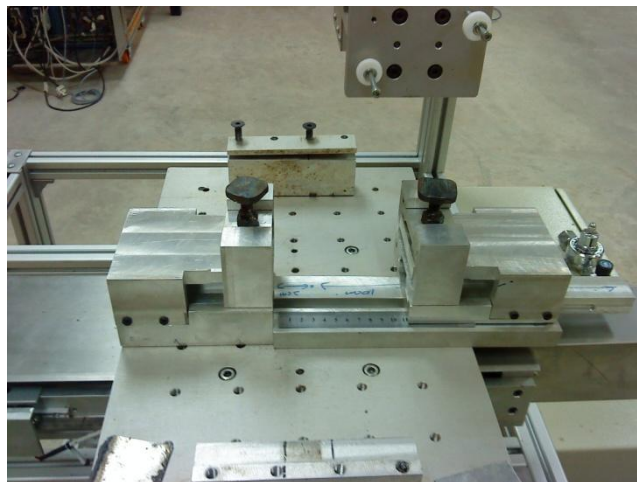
Assemble of welding jigs on the welding table by using screws.
